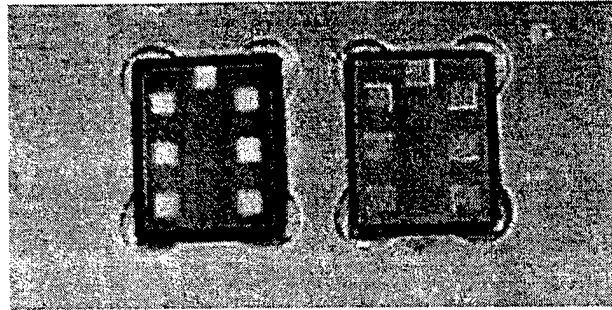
As received solderable IGBT device (the right one) and one IGBT after putting protective coating (the left one).
